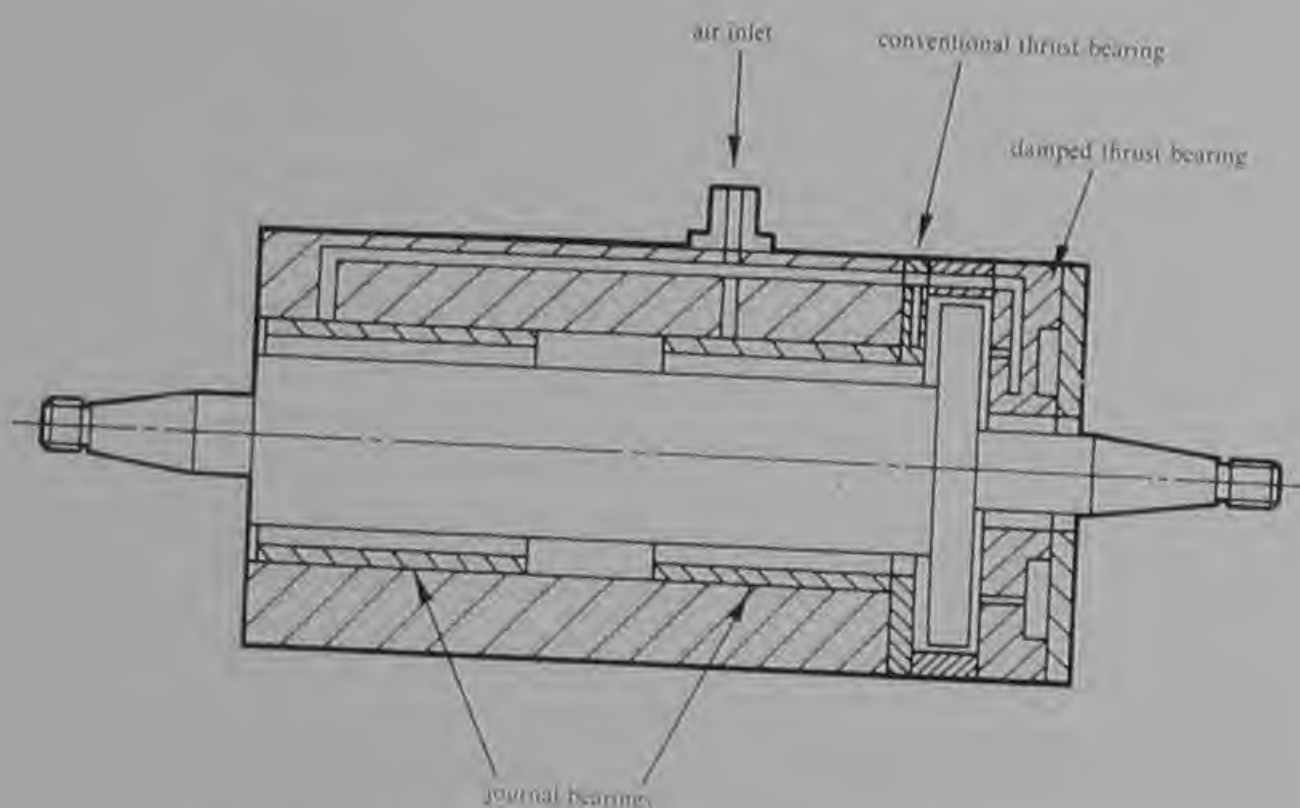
Aerostatic machine tool spindle with damping cavity on one thrust bearing
